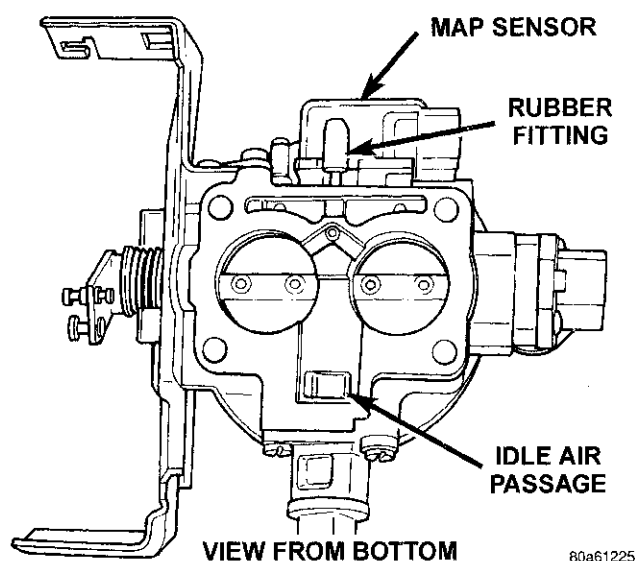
Throttle Body Air Control Passage—3.9L/5.2L/5.9L Engines
